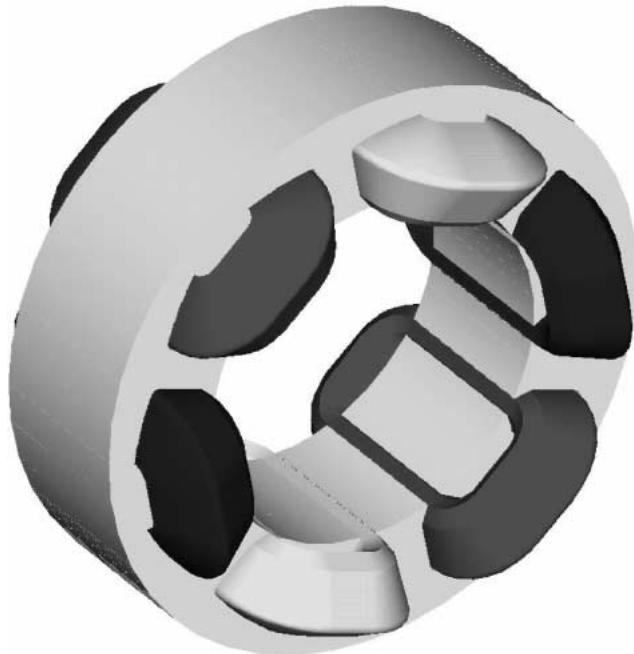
General machine arrangement for a 12-10 three-phase SRM with single-tooth windings
